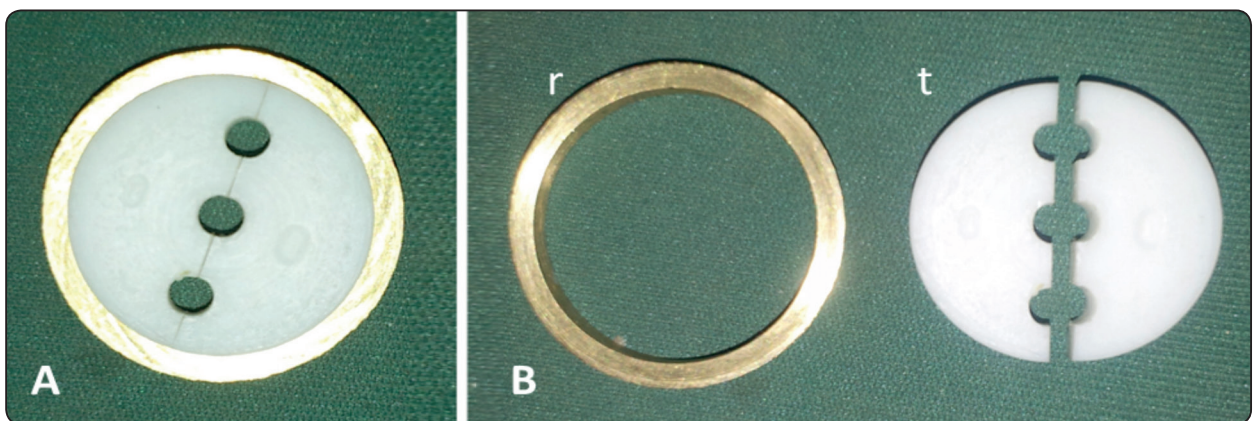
The three-piece split mould used for preparing specimens in (A) an assembled and (B) disassembled form consisting of an outer brass ring (r) and two inner Teflon complementary halves (t).
